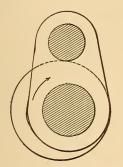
One Eccentric, Lapless Valve with Rocker.
